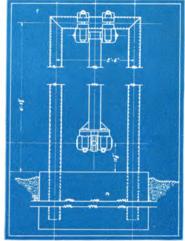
Blue print showing construction of Lufkin Hold-up and Hold-Down.
